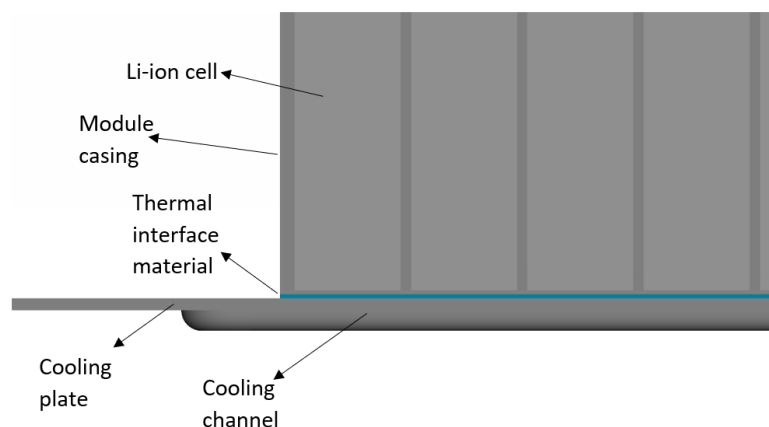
Cross-sectional view of the battery module assembly.
